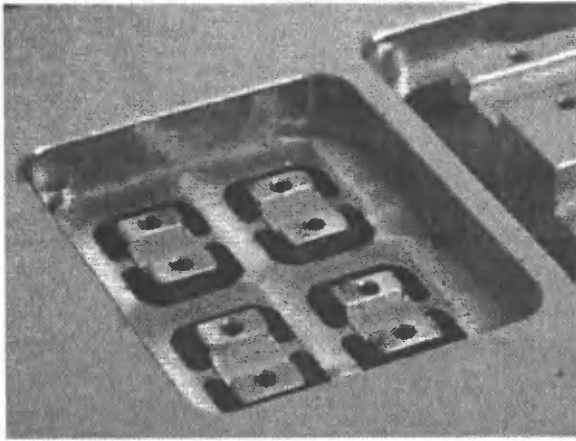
Pocket on the plate surface for the non-standard thickness workpieces
